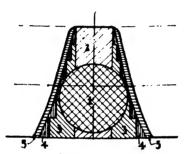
Outline of gear tooth showing the metal to be removed.
